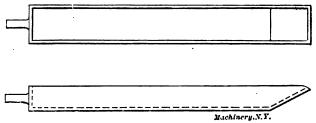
Cast-iron Box in which Blades are Packed and Heated
